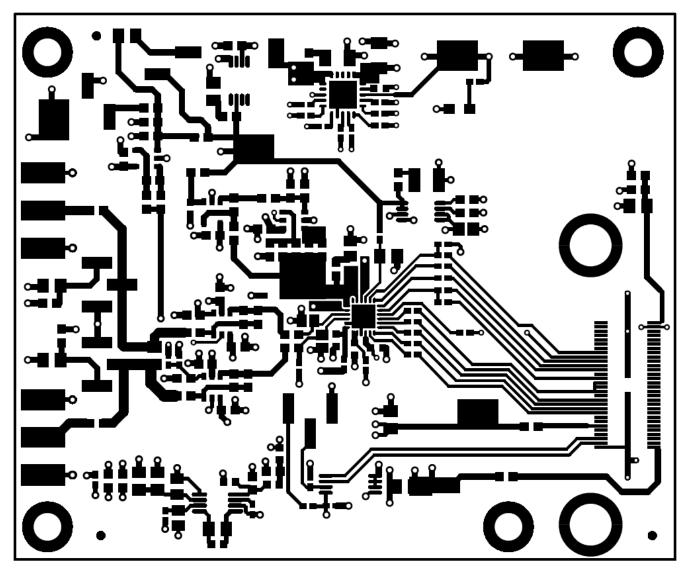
ADS8920BEVM PCB Layer 1: Top Layer
